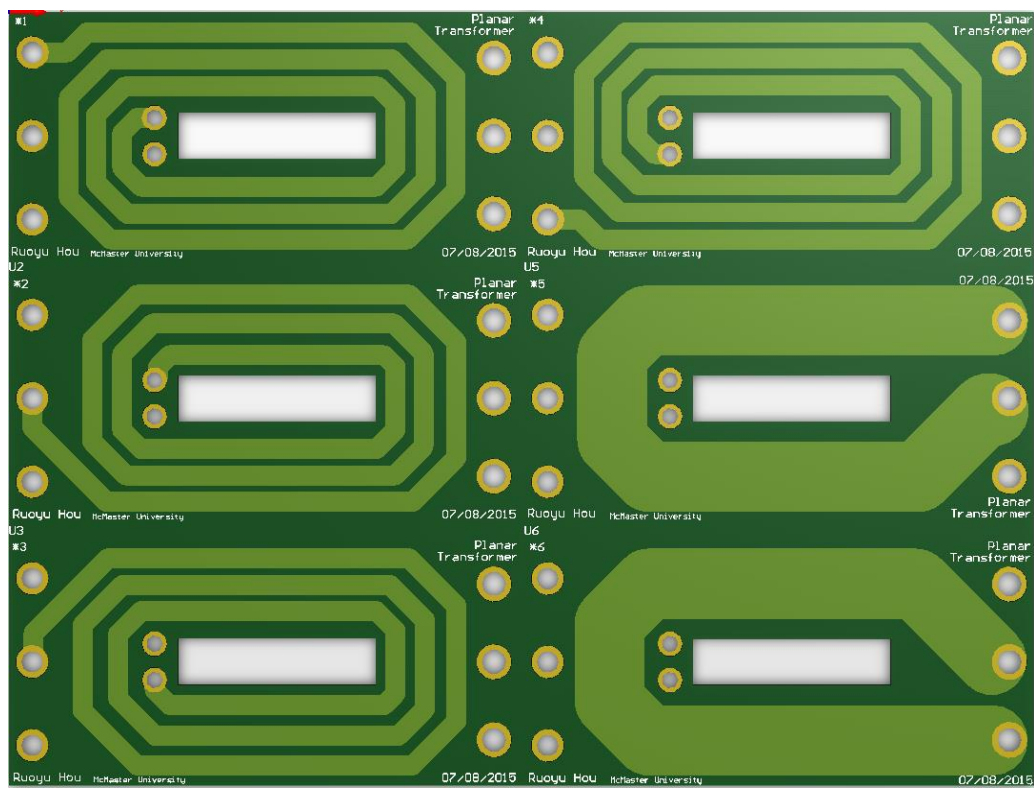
PCB layout of the 12:2 planar transformer.
